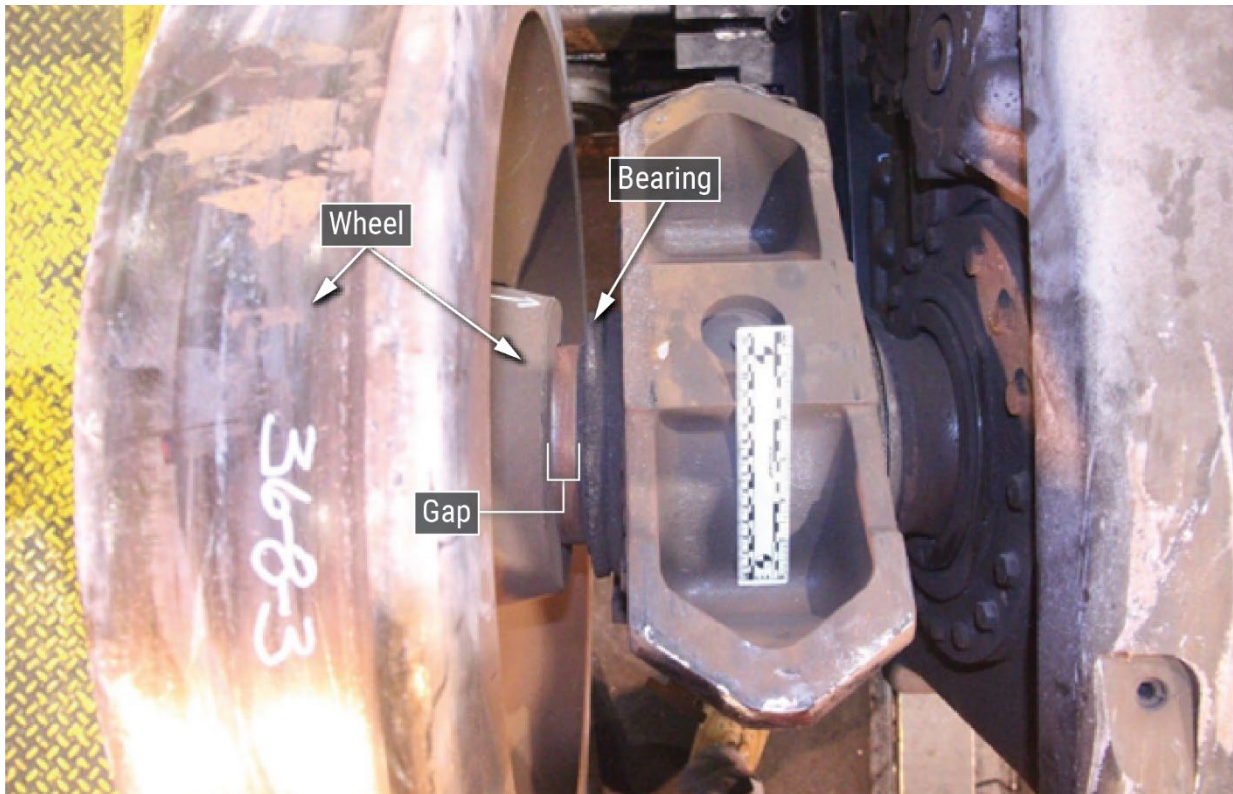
Gap between the left-side wheel and bearing on wheelset #4.
